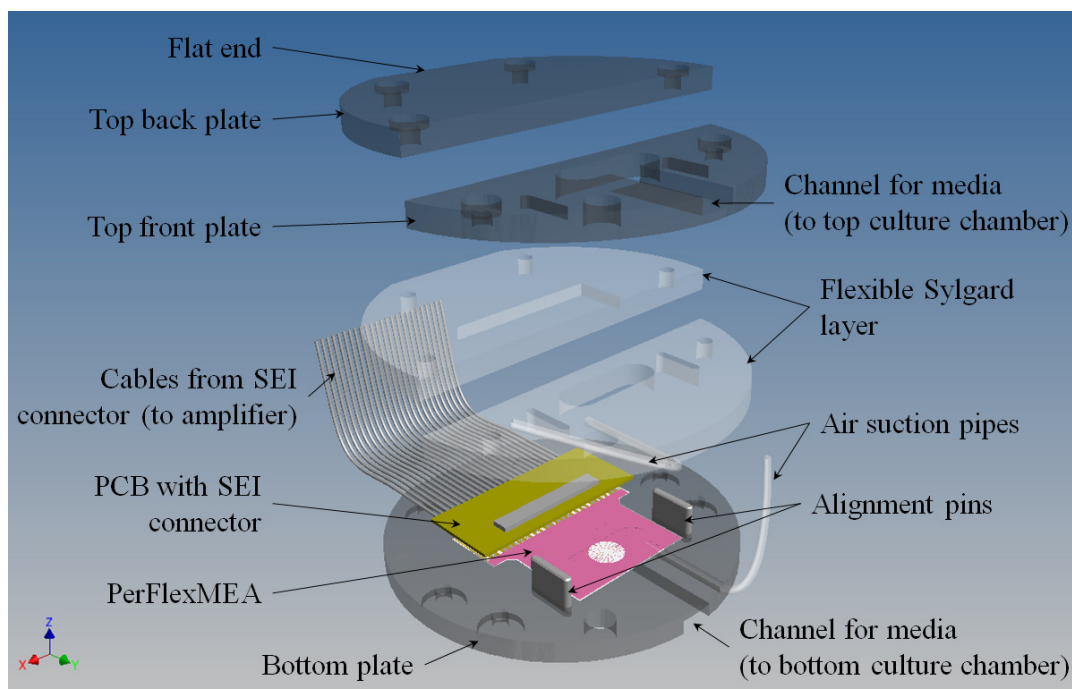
Exploded view of the coin setup for housing the PerFlexMEA. The PerFlexMEA was located on the bottom plate with the cell culture zone falling in the culture chambers of the top and bottom plate. The SEI contacts molded in Sylgard, interfaced with the contact pads of the PerFlexMEA. The flexible Sylgard layer was sandwiched between the rigid PCTE plates (top and bottom plates). Channels were provided to each cell culture chambers to allow the flow of media into them. Air suction pipes were provided to remove air bubbles from whichever chamber faces bottom. View was produced using Autodesk Inventor Professional 2011.
